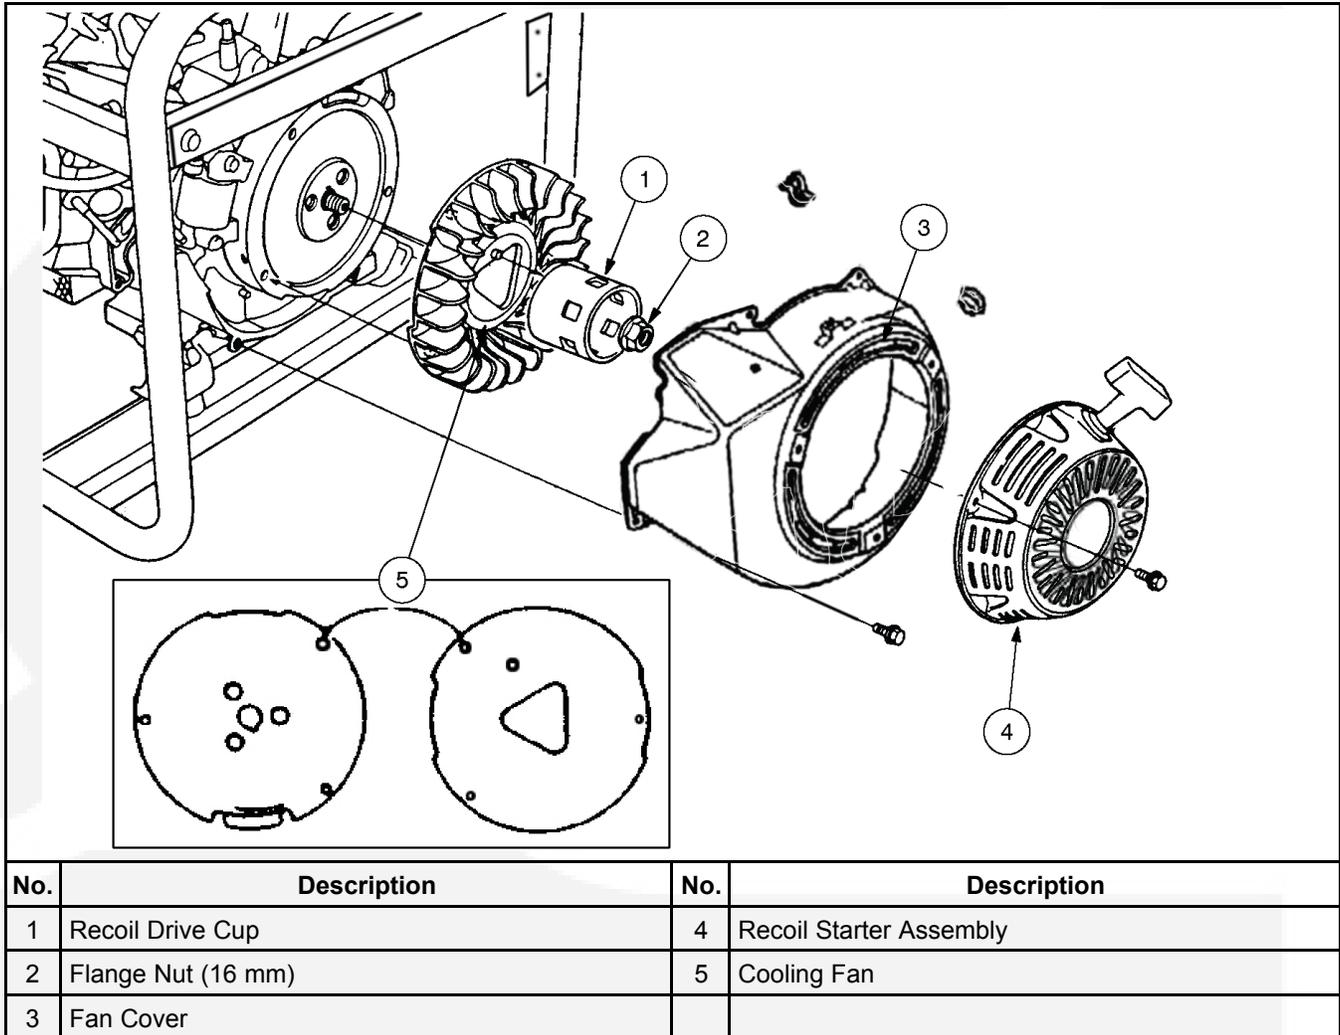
RECOIL STARTER AND FAN ASSEMBLY
